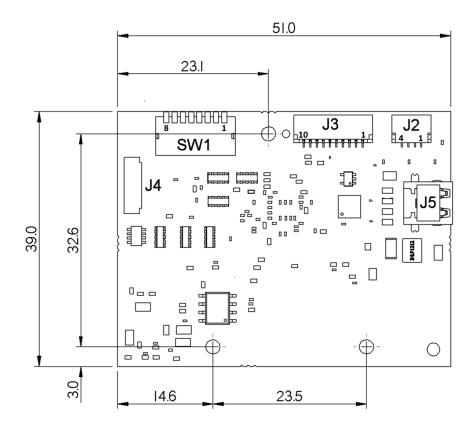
Mechanical overview, side B (Note – when mounted on a camera, this side faces the camera)
